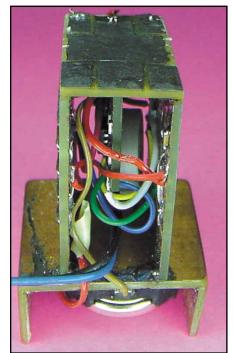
Shown here is the U-shaped touch pad section mounted on the top of the base section. All parts are in place. Note that the IC board and piezo buzzer are located between the touch pad boards.
